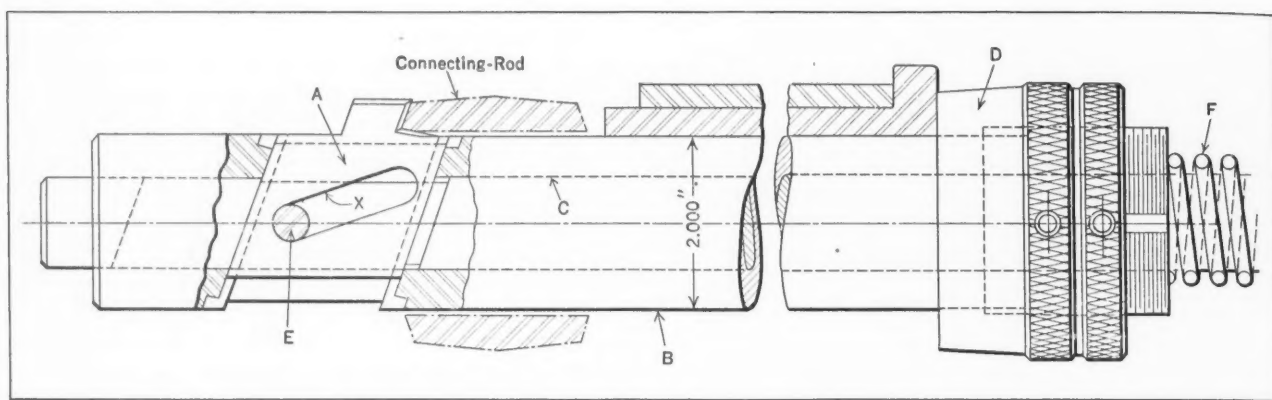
Special Tool with a Cutter Blade that is Fed Radially for Back-facing Automobile Connecting-rods
